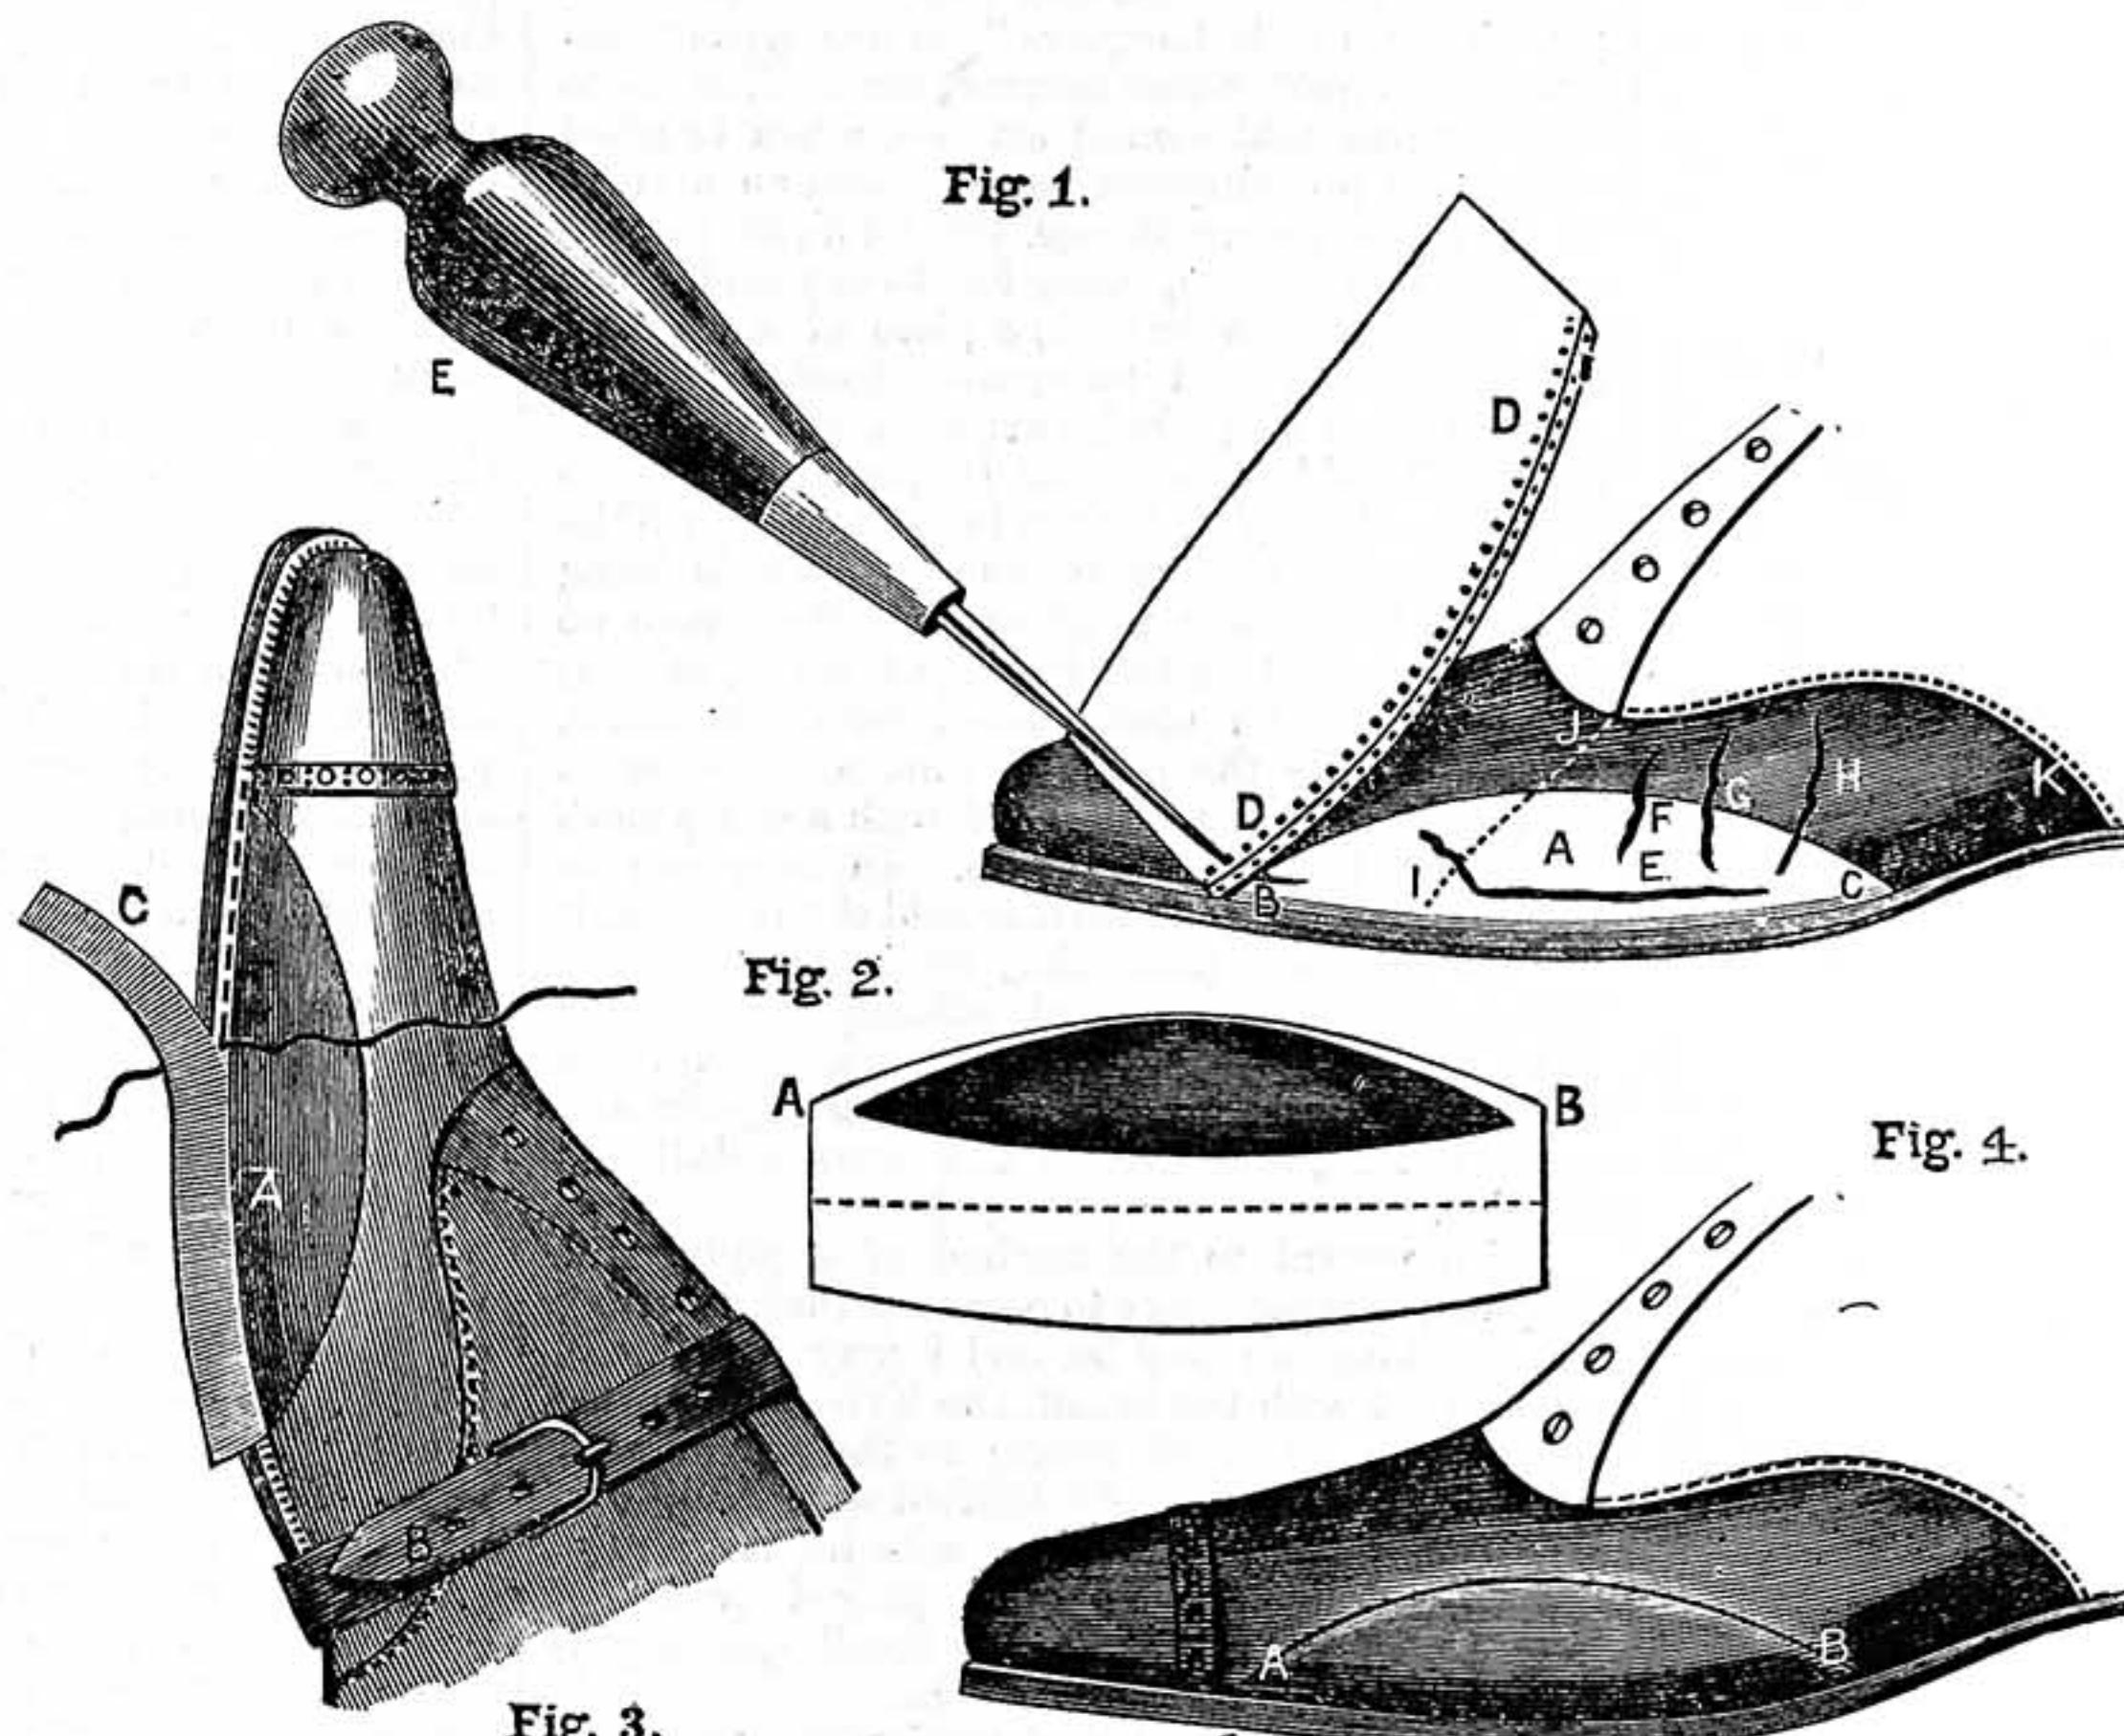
Repairing Worn or Cracked Leather with Patch. Fig. 2.—New Piece of Leather. Fig. 3.—Mode of tucking Patch into Crevice. Fig. 4.—Mode of sewing of Patch.
